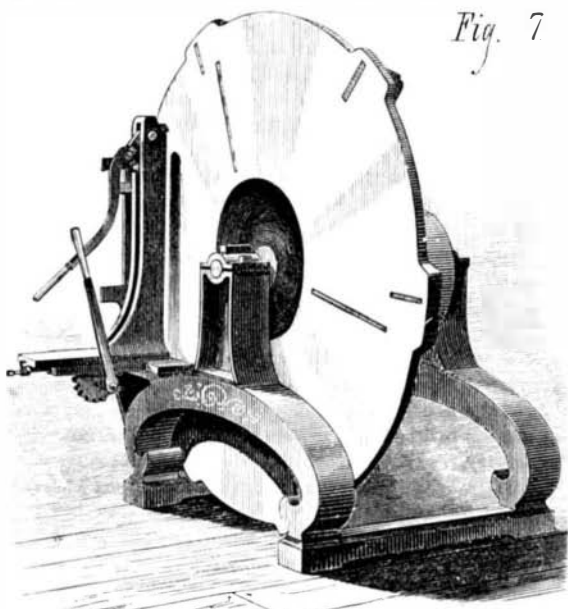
BARREL HEAD DRESSING AND JOINTING MACHINE.
